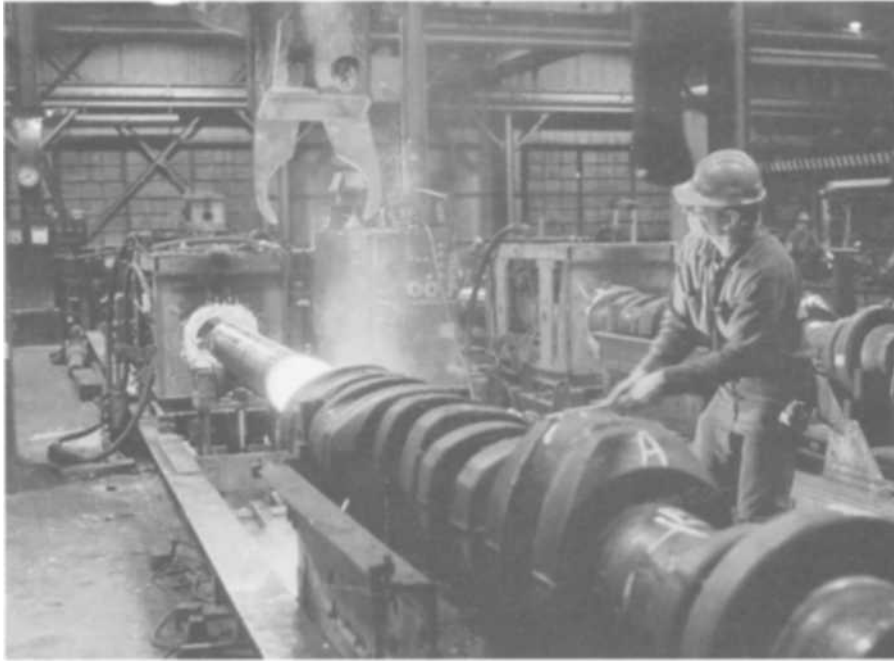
A partially completed crankshaft forging being removed from an induction heating furnace for transfer to the closed die forging press. (Courtesy Ellwood National Crankshaft Company)
